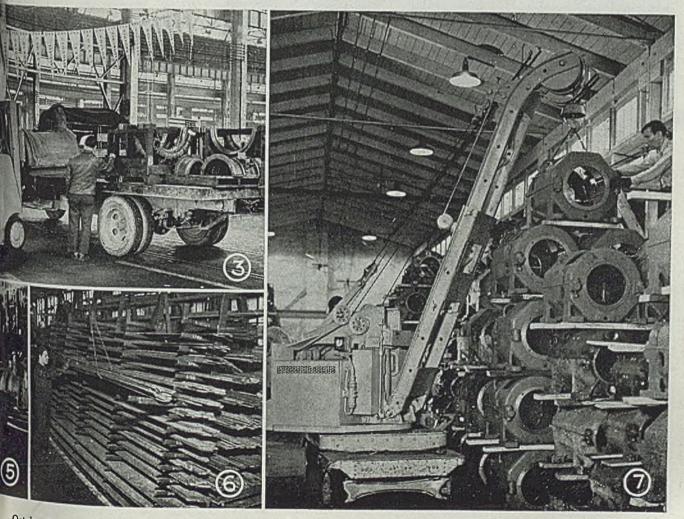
Pallet loads to be moved from one building to another are quickly loaded by fork lift truck onto flat-bed highway truck. Unloading at destination will be done in same manner. Railcar hauls also are used. Ample loading space is provided at these transfer points
